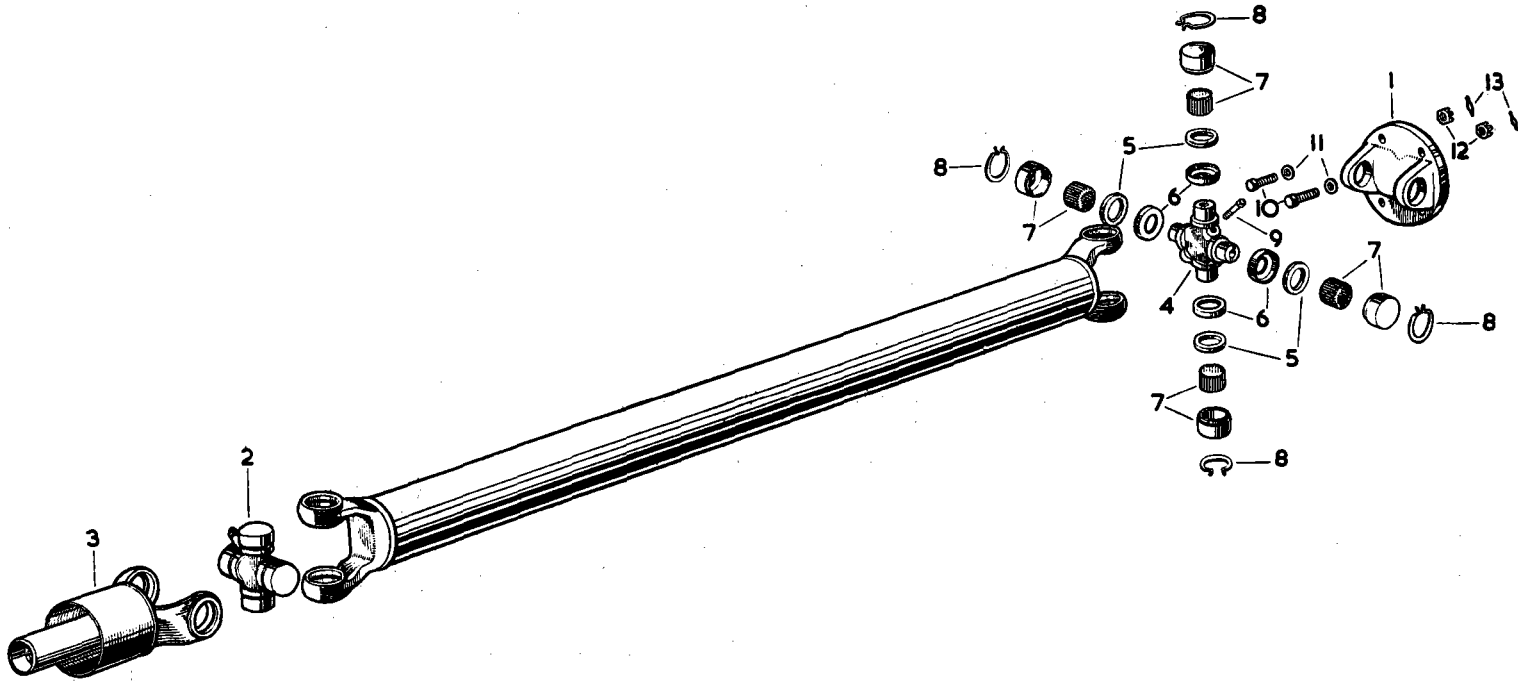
Exploded view of propeller shaft assembly (Standard transmission propeller shaft illustrated). (Early Cars only).
